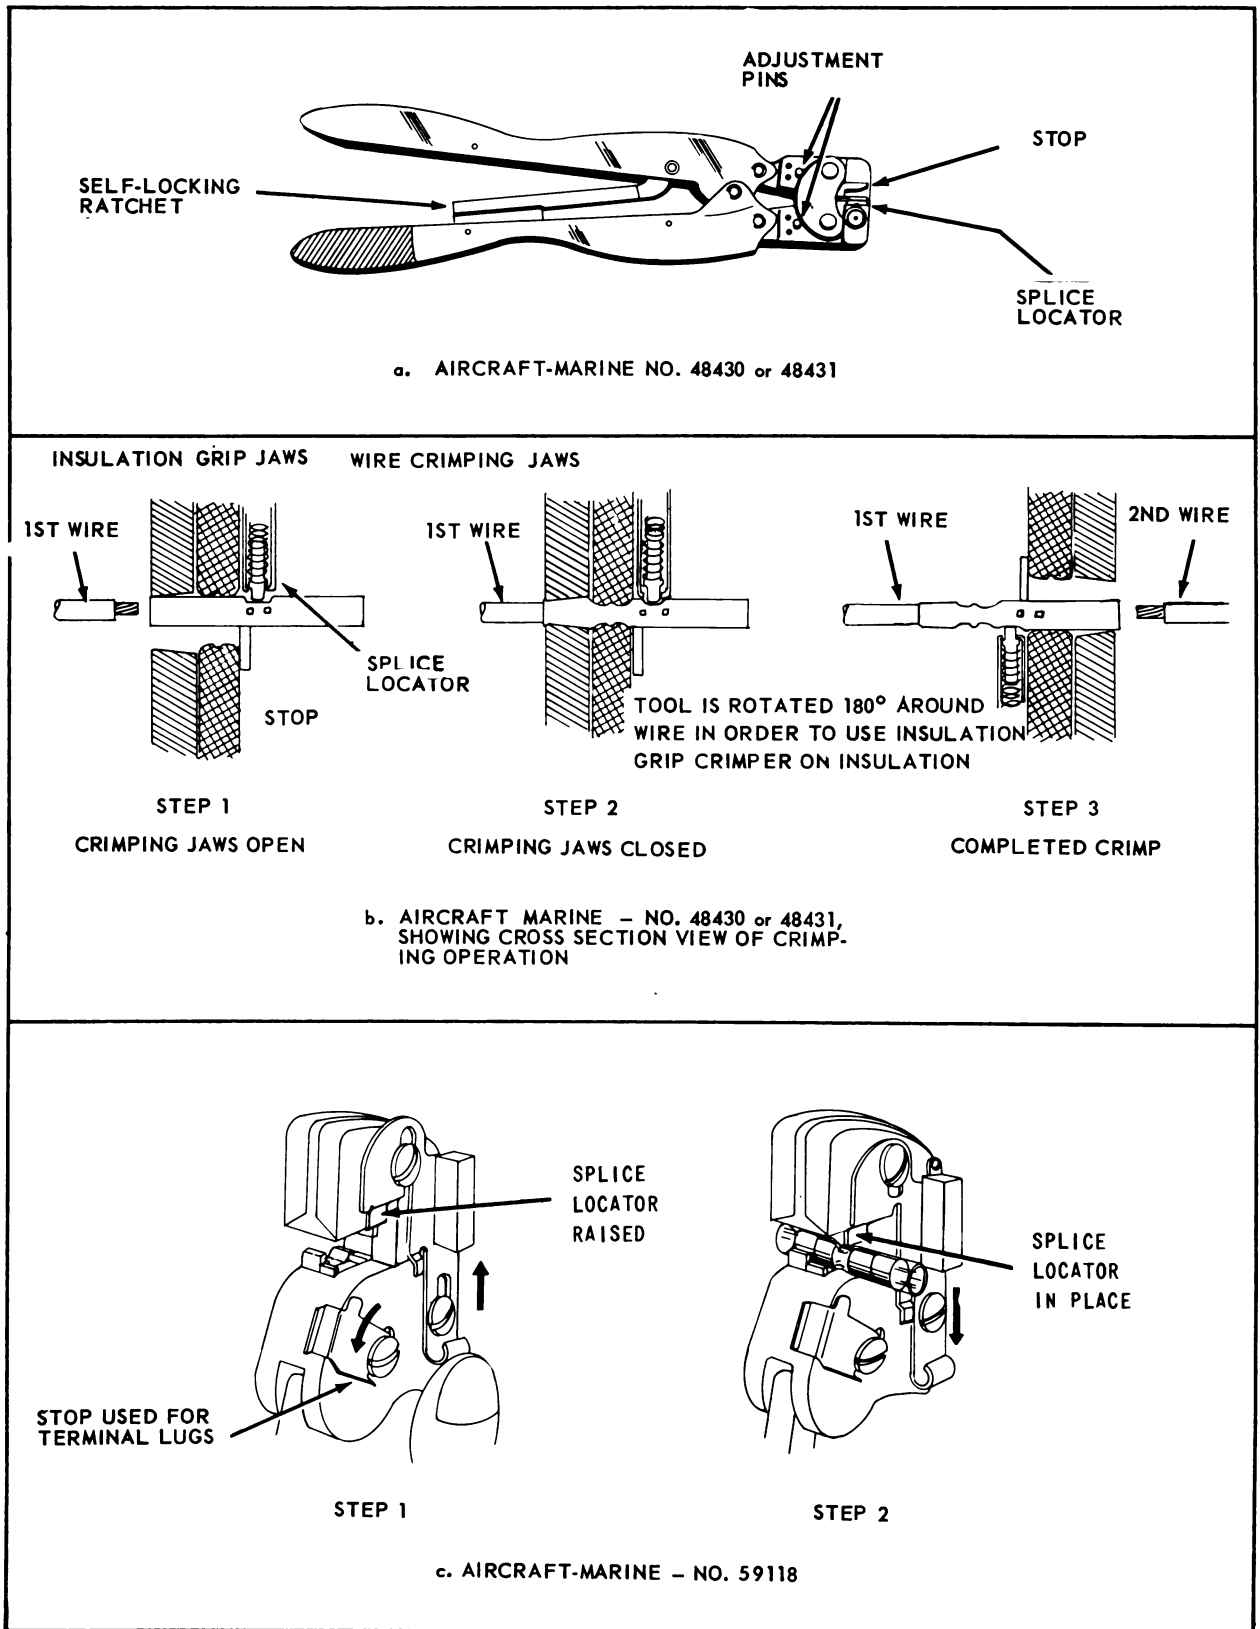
Tools - Hand Crimping - With Splice Locator
